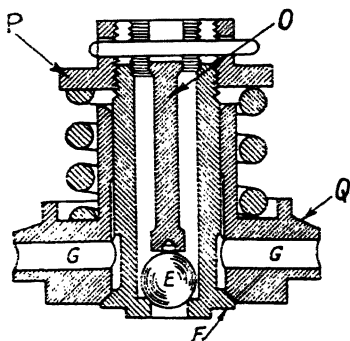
ENLARGED CROSS-SECTION OF THE MAIN VALVE UNIT
